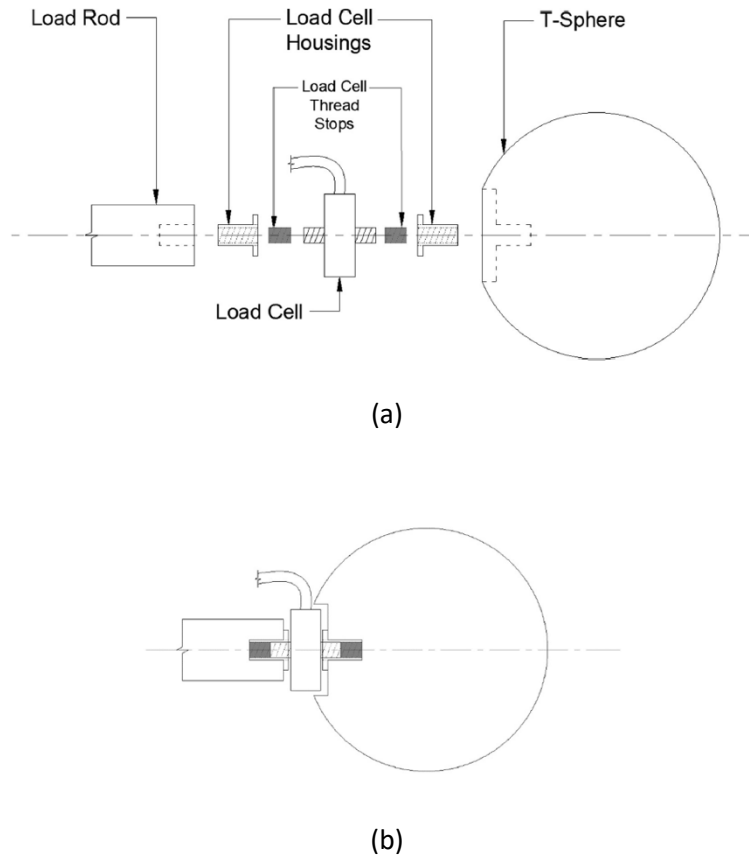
Assembly of loading rod, load cell, and sphere; (a) exploded view, (b) assembly
